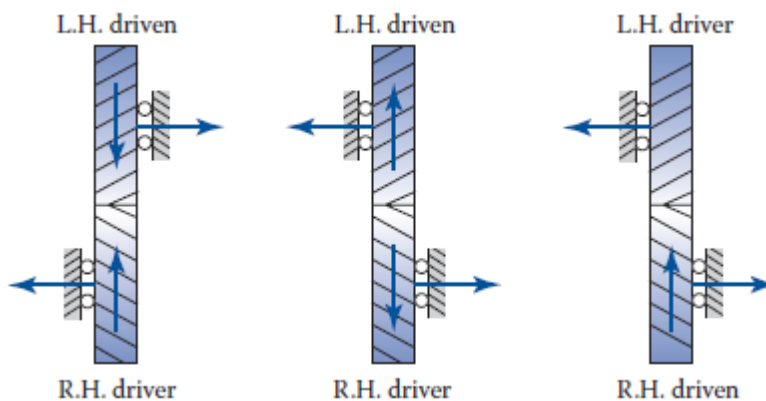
Direction, rotation, and thrust load for three helical gearsets with parallel shafts.
